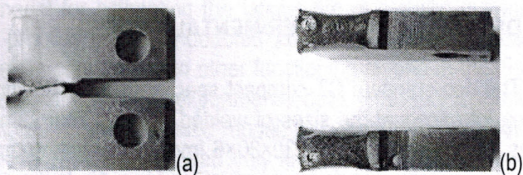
CT mini-specimen produced from steel tube used in the power plant: crack view (a); (b) specimen after fracture. Specimen thickness was equal to 5.5 mm
